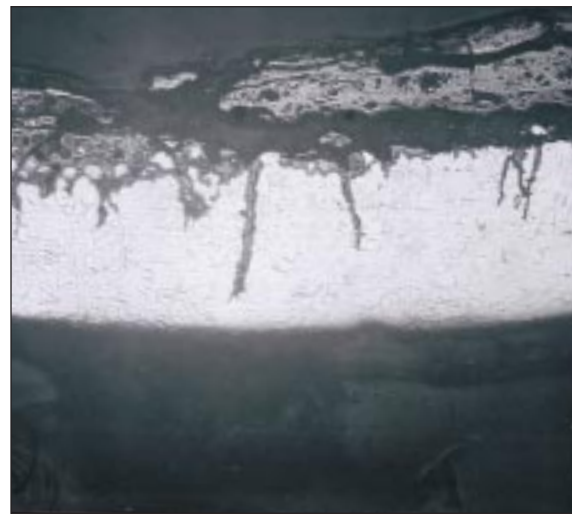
Transverse section of the inner ply of an AISI 321 bellows, showing transgranular stress-corrosion cracking and intergranular corrosion originating on the outside diameter.
